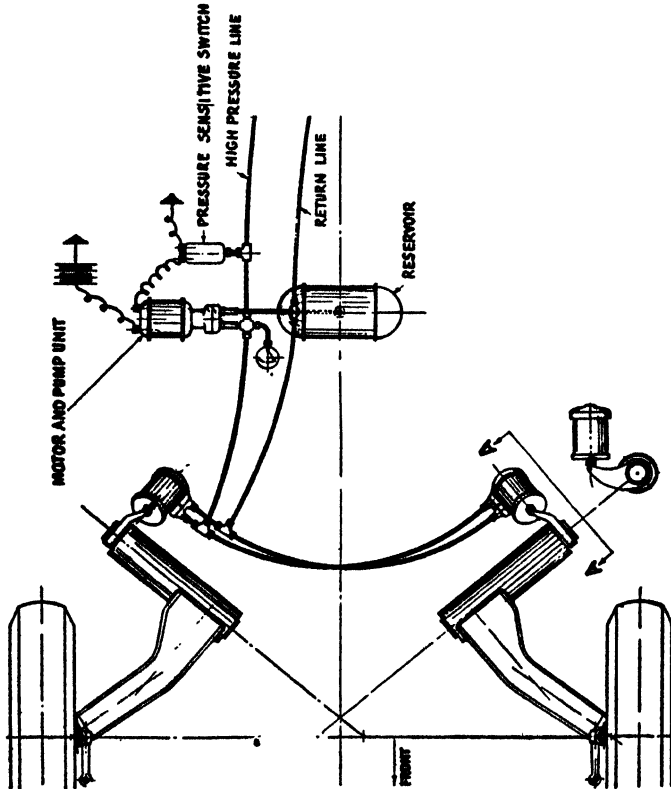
AUTOMATIC CONSTANT-LEVEL MECHANISM, FRONT SECTION.
